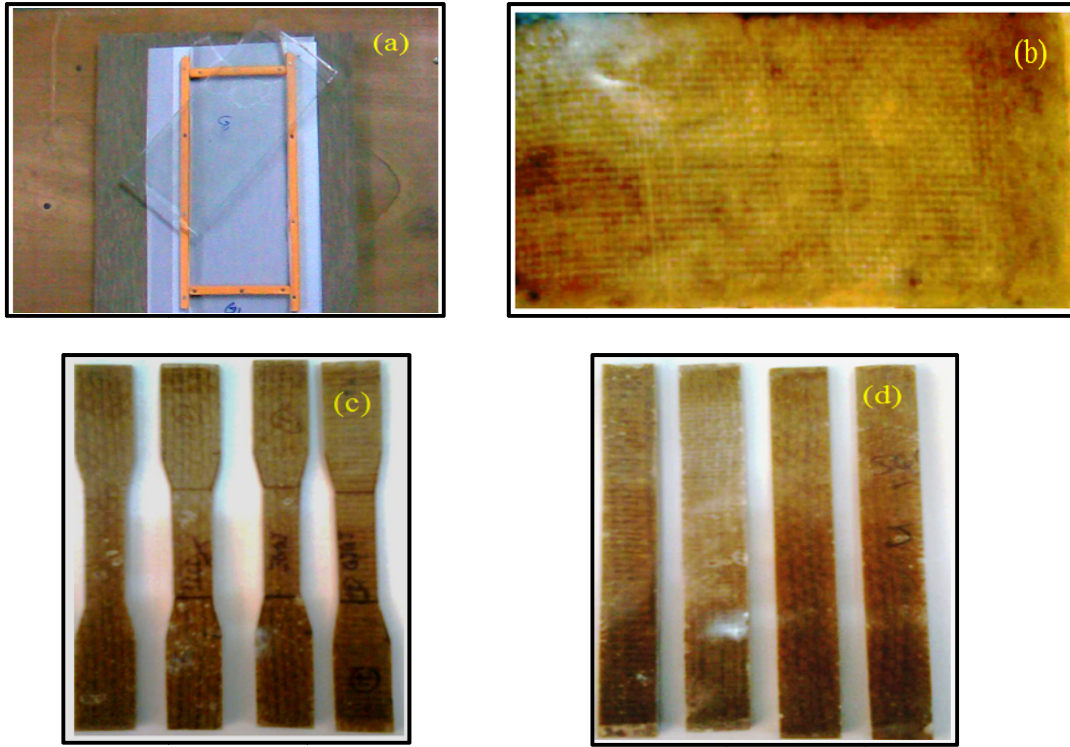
(a) Photograph of composite slab (b) Mold used for composite preparation (c) Specimen for Tensile test and (d) Flexural test
